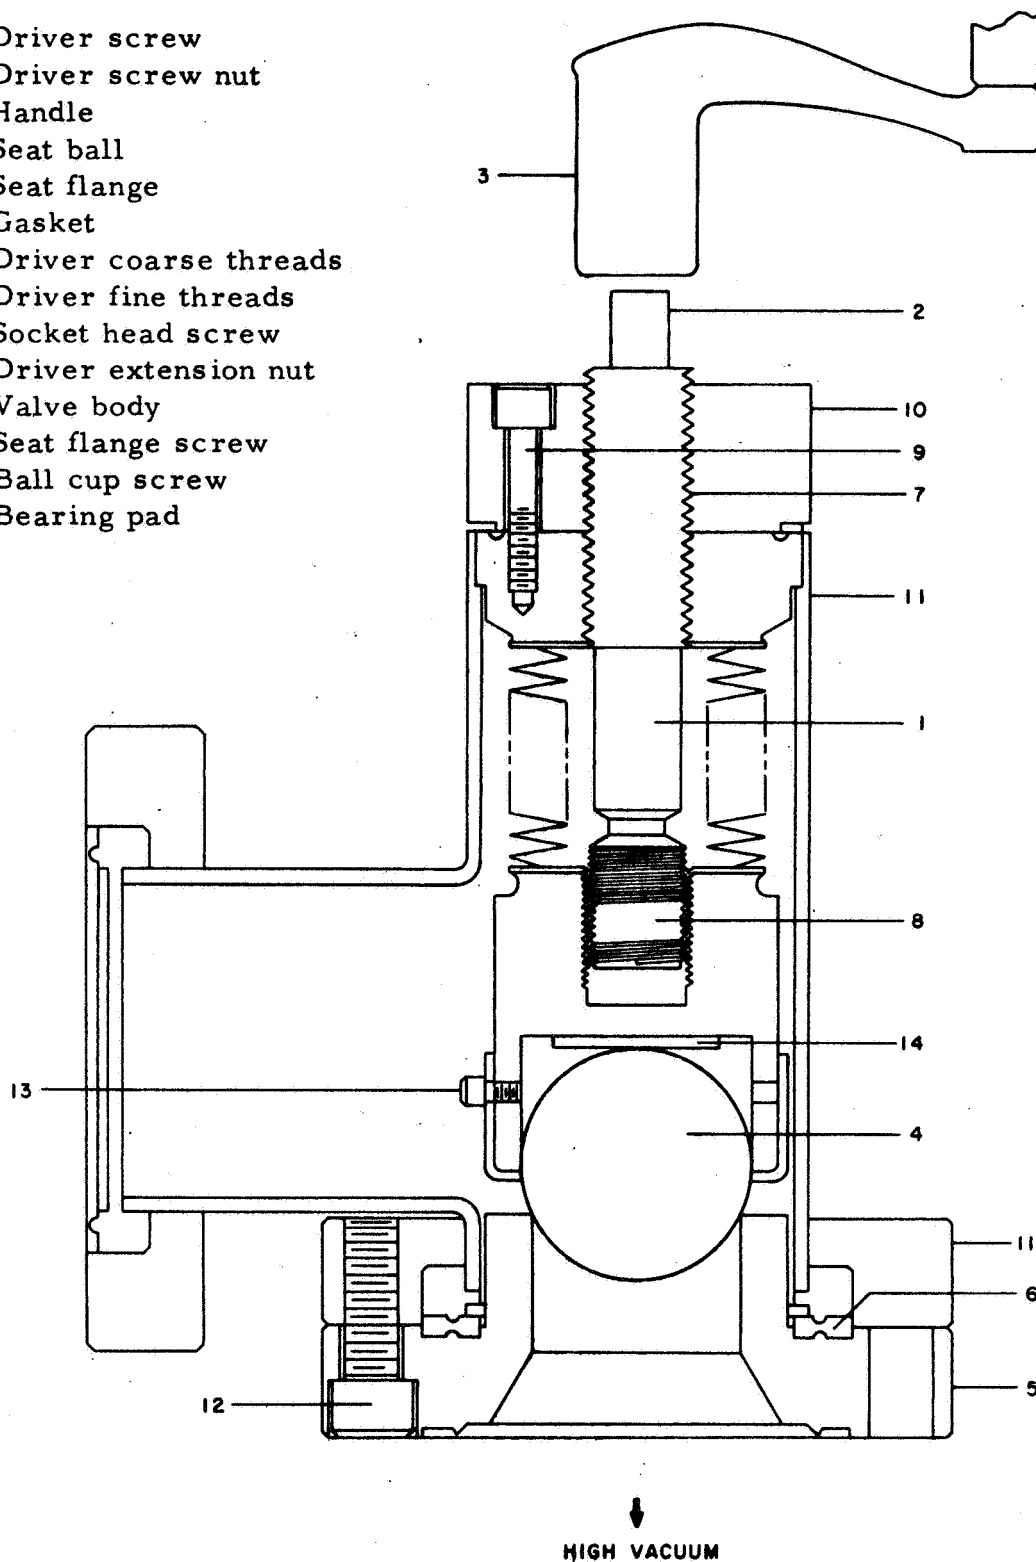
Representative of 6 liters/second ultra-high vacuum bakeable valve
